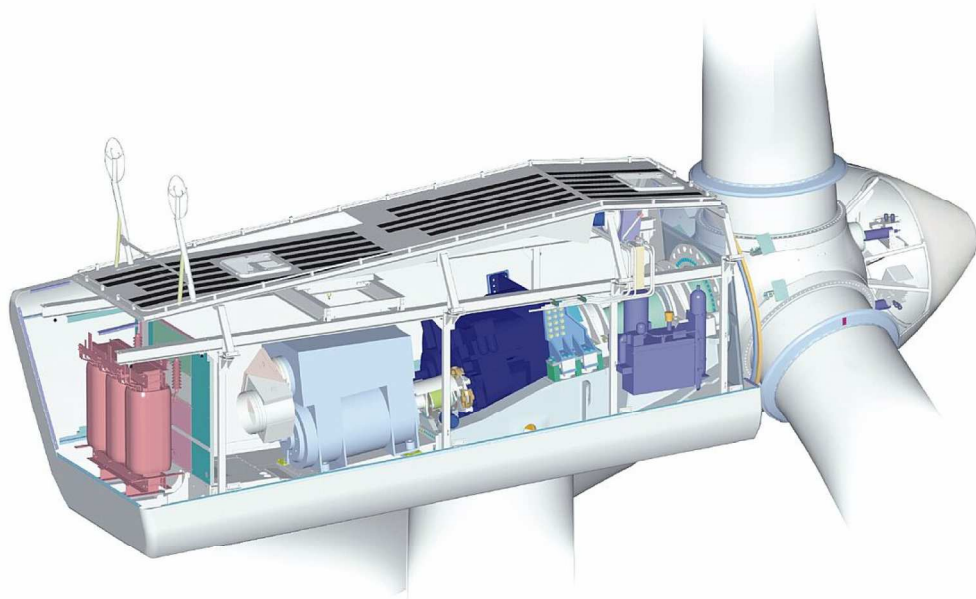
Separate design with double fed induction generator and rotor side converter
